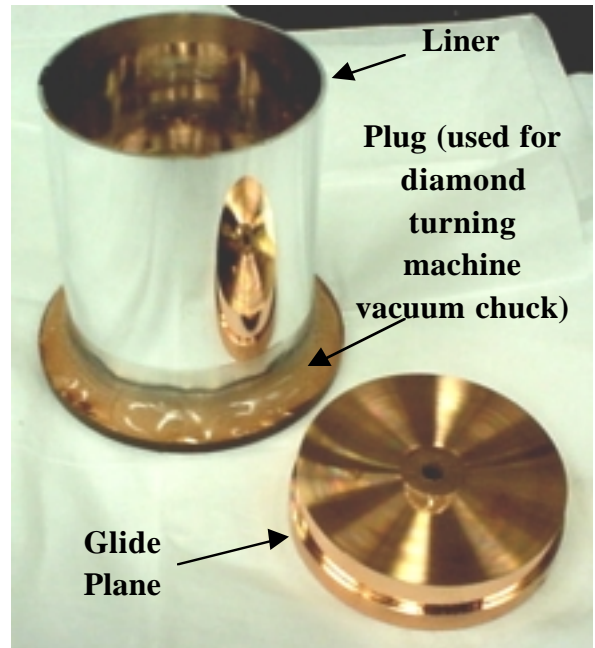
Typical test specimen components fabricated using the ASG-2500 Diamond Turning Machine
